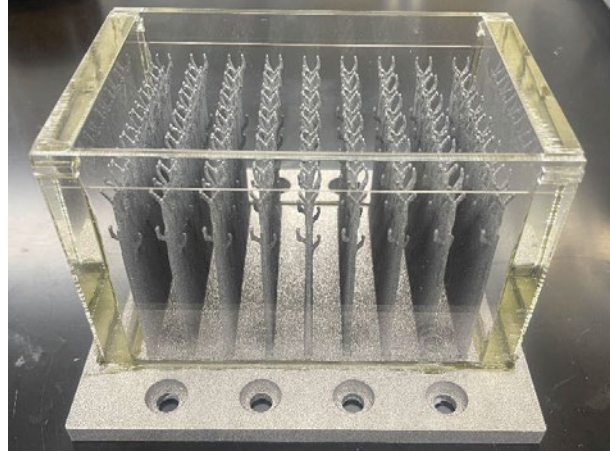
IFSO Test section fabricated with metal additive manufacturing.
